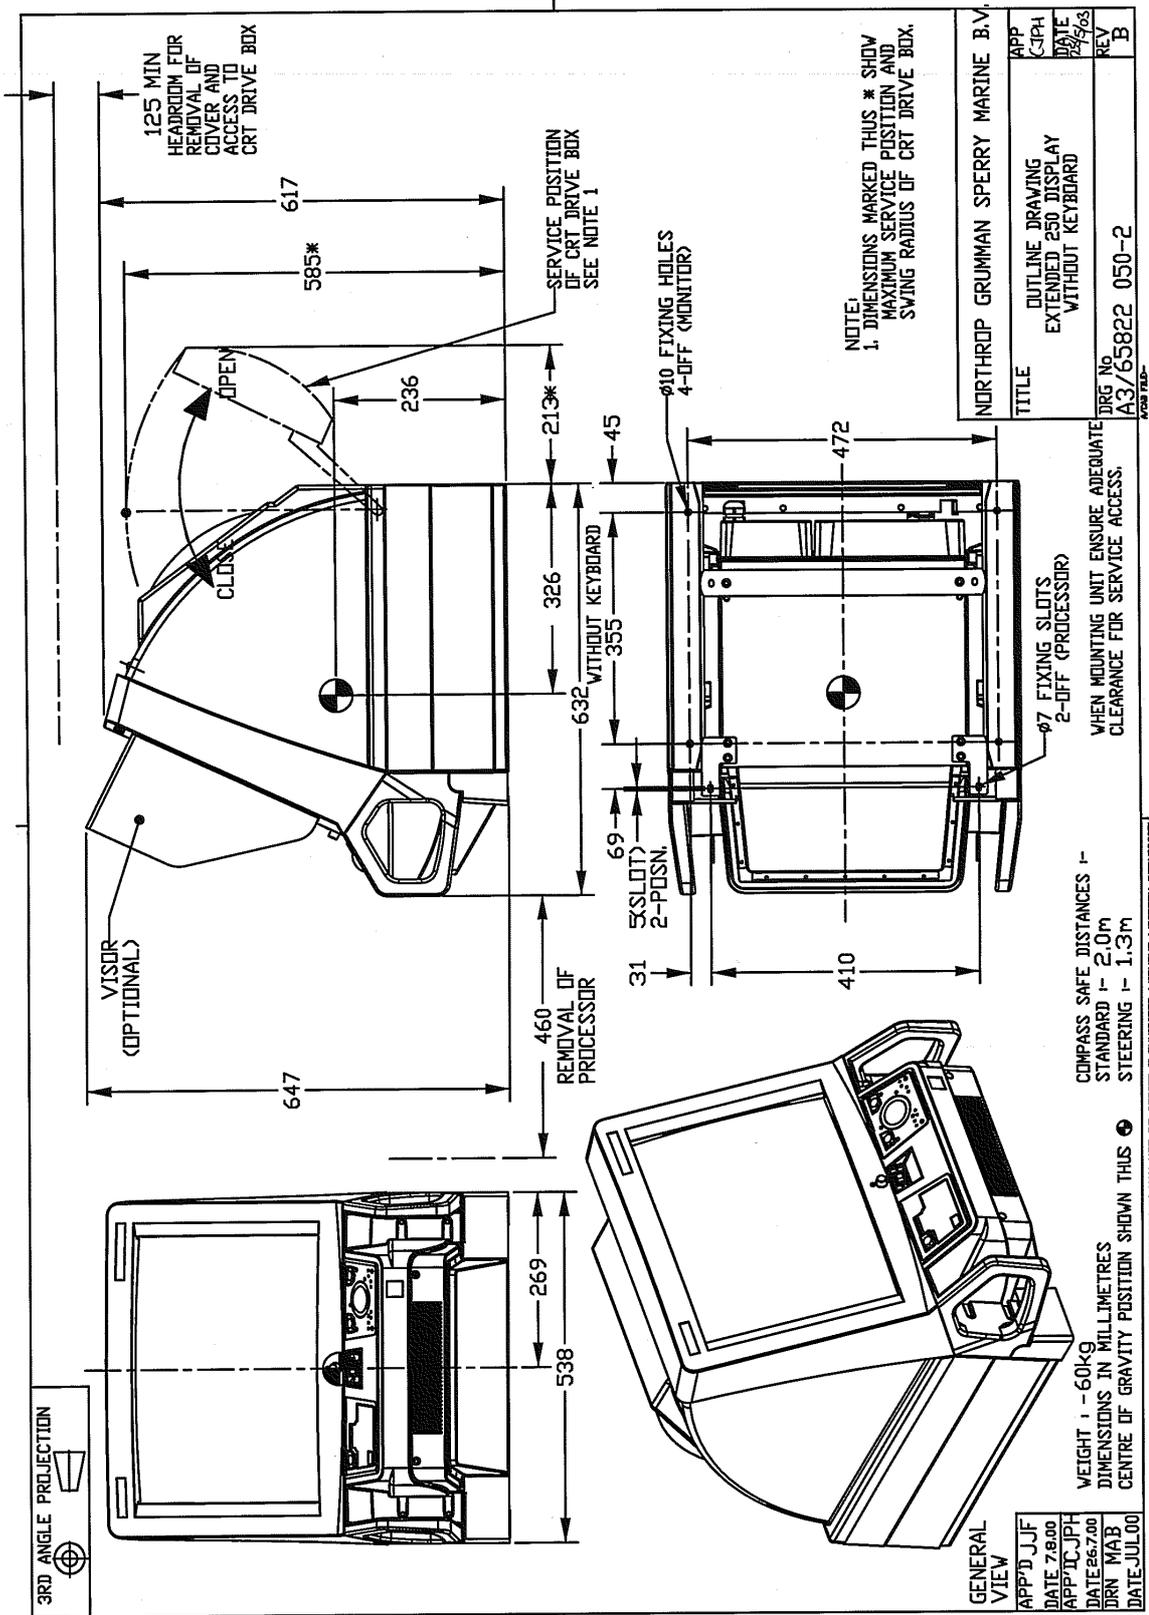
250 Extended Display Unit (CRT) Outline Drawing
